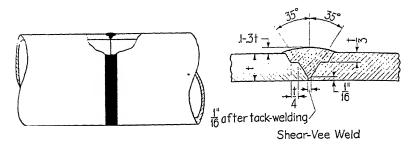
Shear-vee joint for bronze-welding cast iron pipe.
